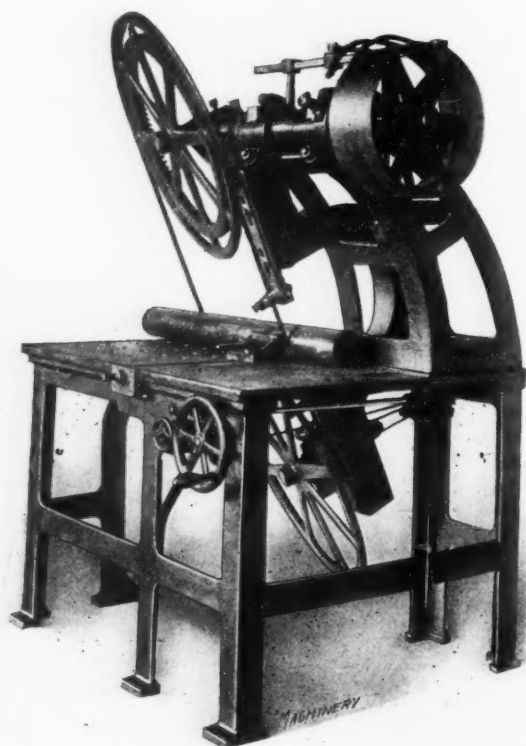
Houghton & Richards Cutting-off Machine in Use on Bar Stock
